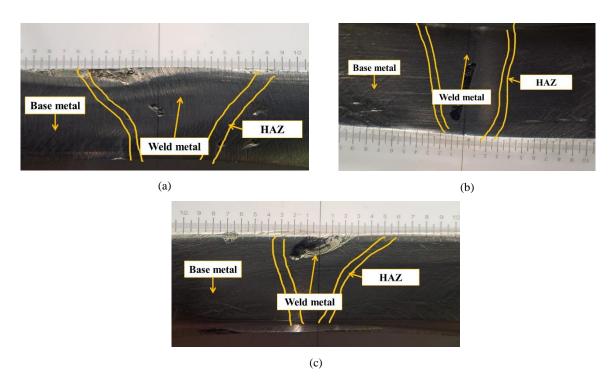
Macro photo of triangle welding movement results at the welding current of (a) 60 A, (b) 80 A, and (c) 100 A.
